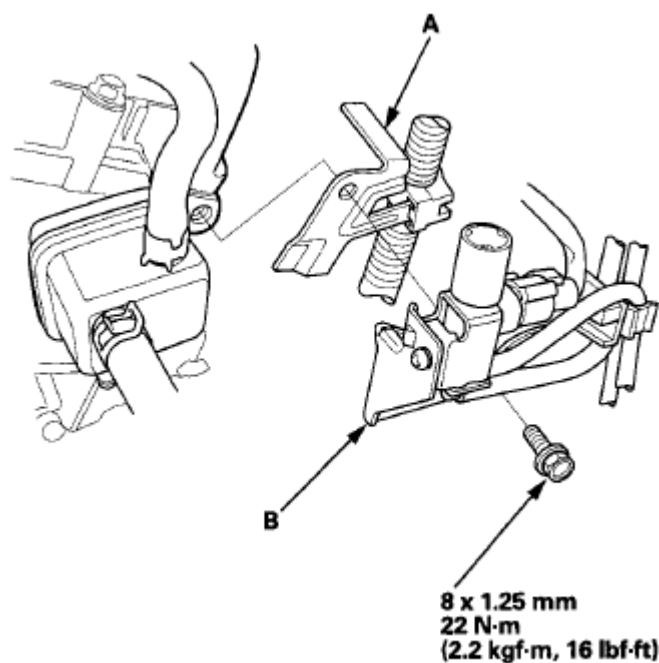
Installing Harness Clamp And Engine Mount Control Solenoid Valve Bracket To Rear Cylinder Head With Torque Specifications
